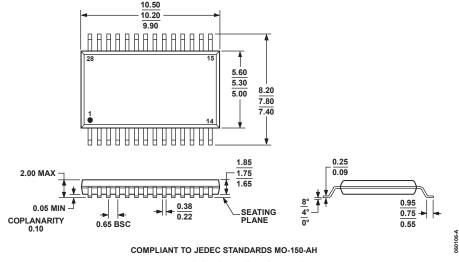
28-Lead Shrink Small Outline Package [SSOP] (RS-28) Dimensions shown in millimeters
